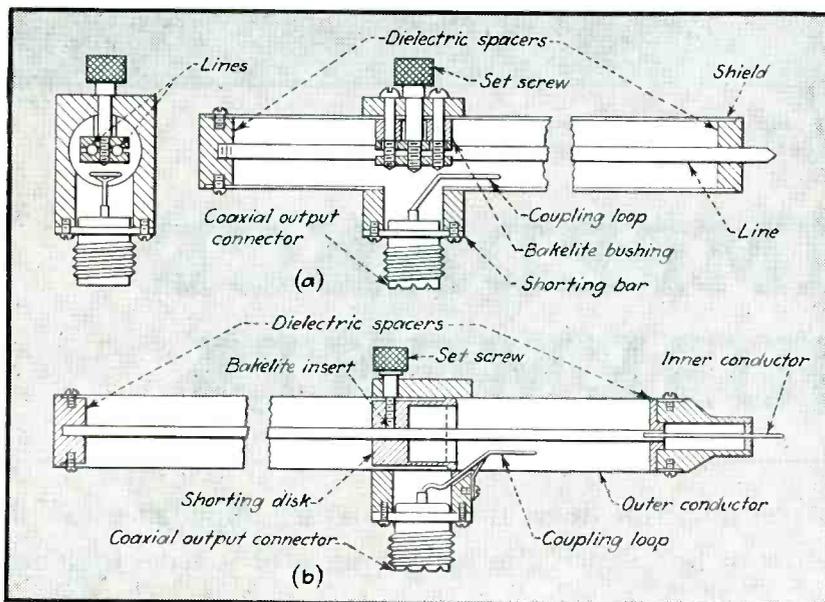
(a) Balanced u-h-f probe construction provides a movable shorting bar and a pickup loop assembled inside a shield. (b) Coaxial probe is similarly constructed, with shorting disk and pickup loop inside the outer conductor of the probe
